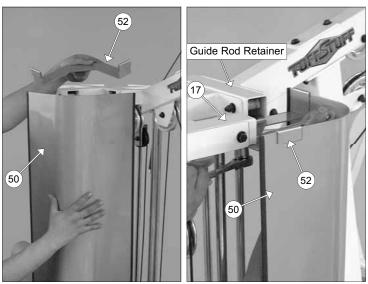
Next, insert one Weight Shield Holder (#52) to the top of the Weight Shield (#50). Next, secure the Weight Shield Holder (#52) along with the Weight Shield (#50) to the two adjacent Guide Rod Retainers (#17) using two Hex Head Cap Screws 3/8-16 X 3/4 (#102), and two Nylon Insert Lock Nuts 3/8-16 (#119).
